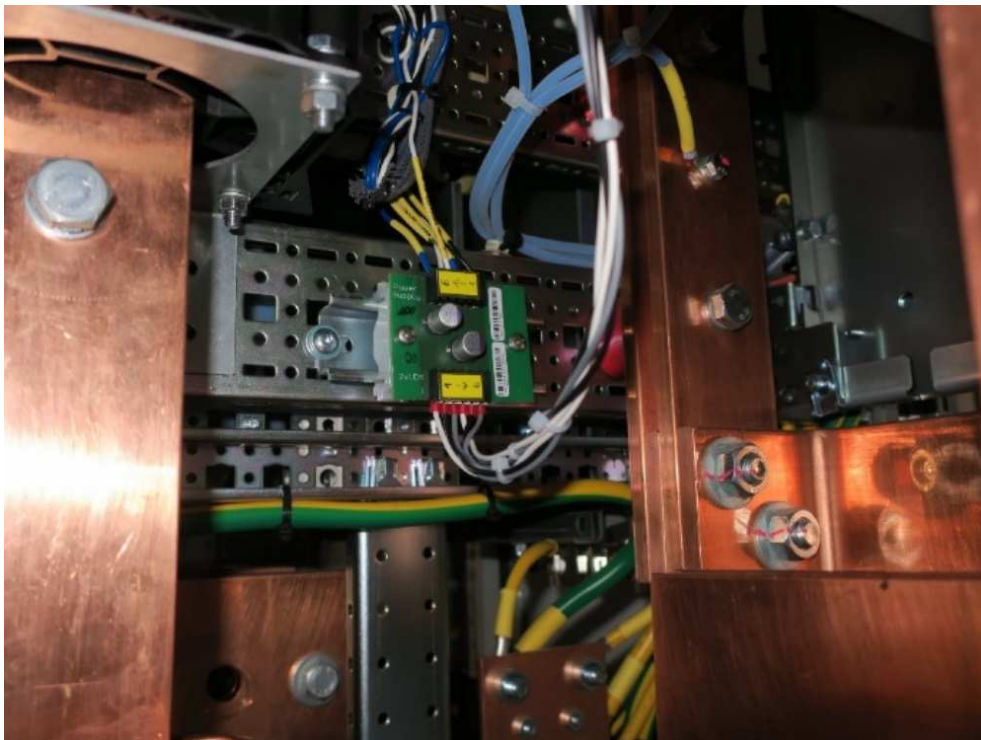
Ready assembled capacitor board D004-A6 in the feed-in field + 1S3
